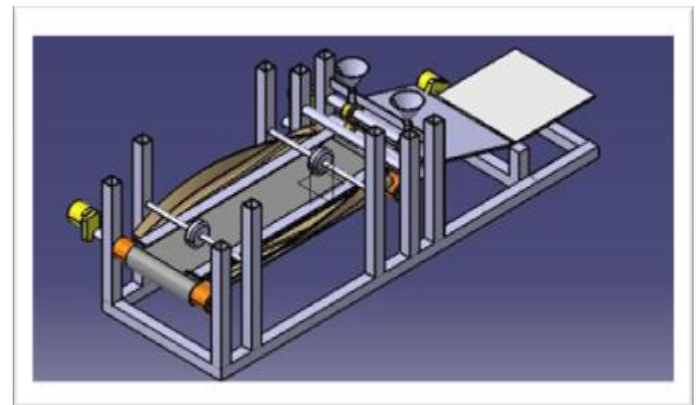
CATIA Model of Paper Bag Manufacturing Machine
